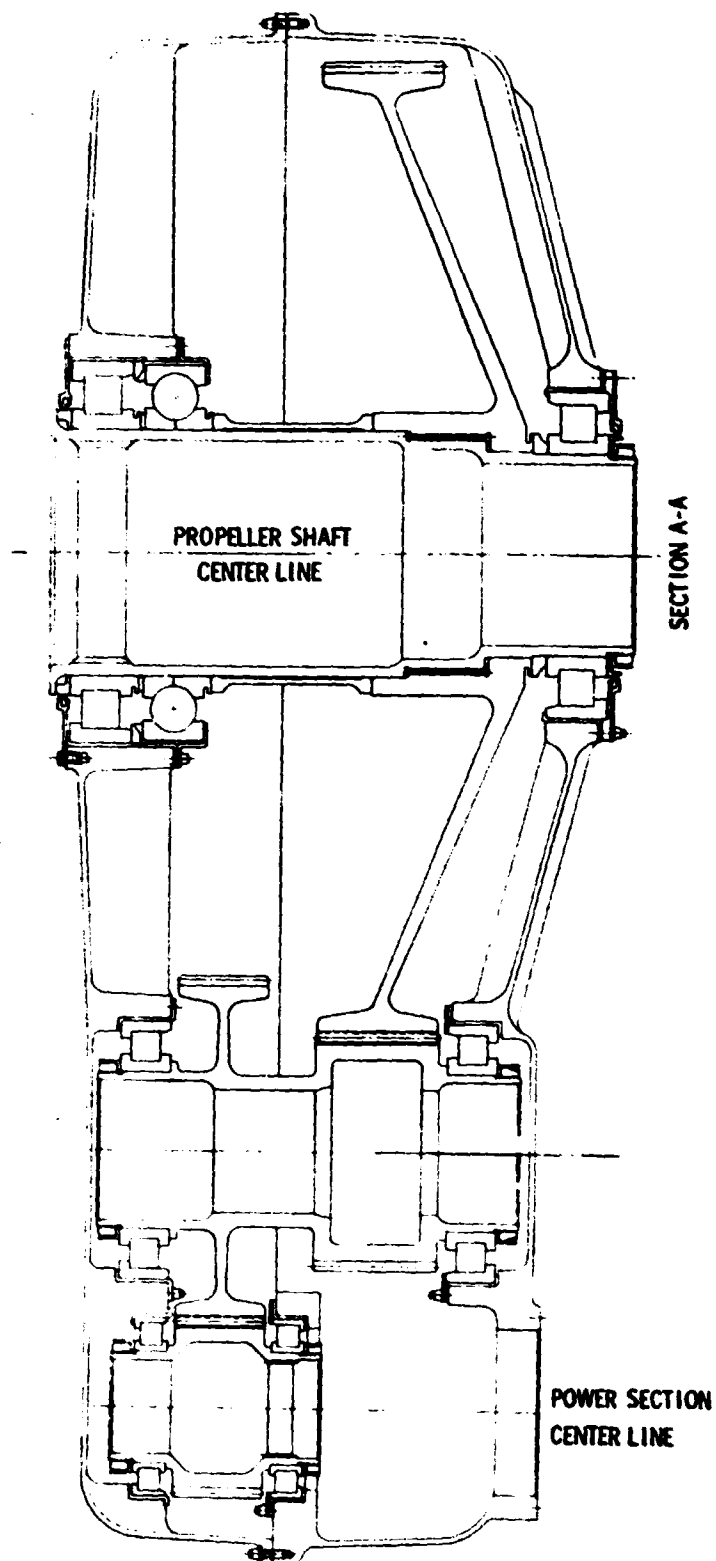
Basic dual compound idler gearbox powertrain.
